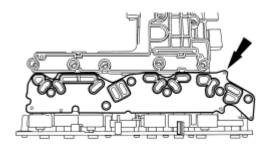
Identifying LH Camshafts Bolts Courtesy of FORD MOTOR CO.
